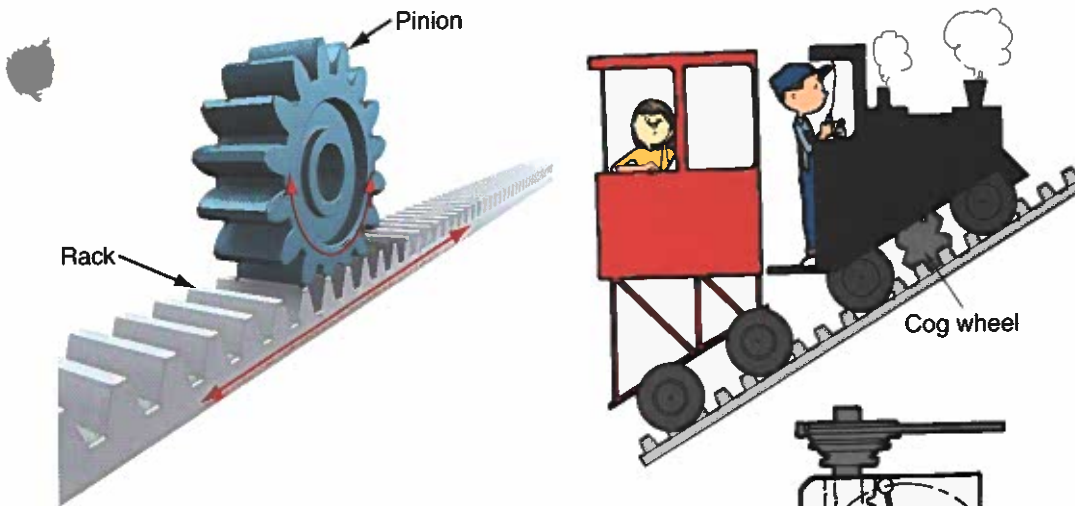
Rack-and-pinion gears convert rotary motion to straight-line motion.
